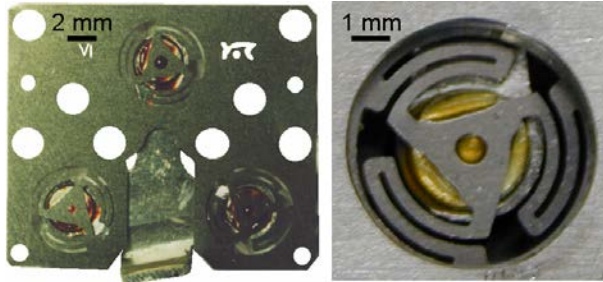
Left) Top view of the stainless steel sheet with the three springs sustaining the platform. Right) Top view of a leaf-spring. It was composed of three branches, on which special grease had been applied to increase the damping.
